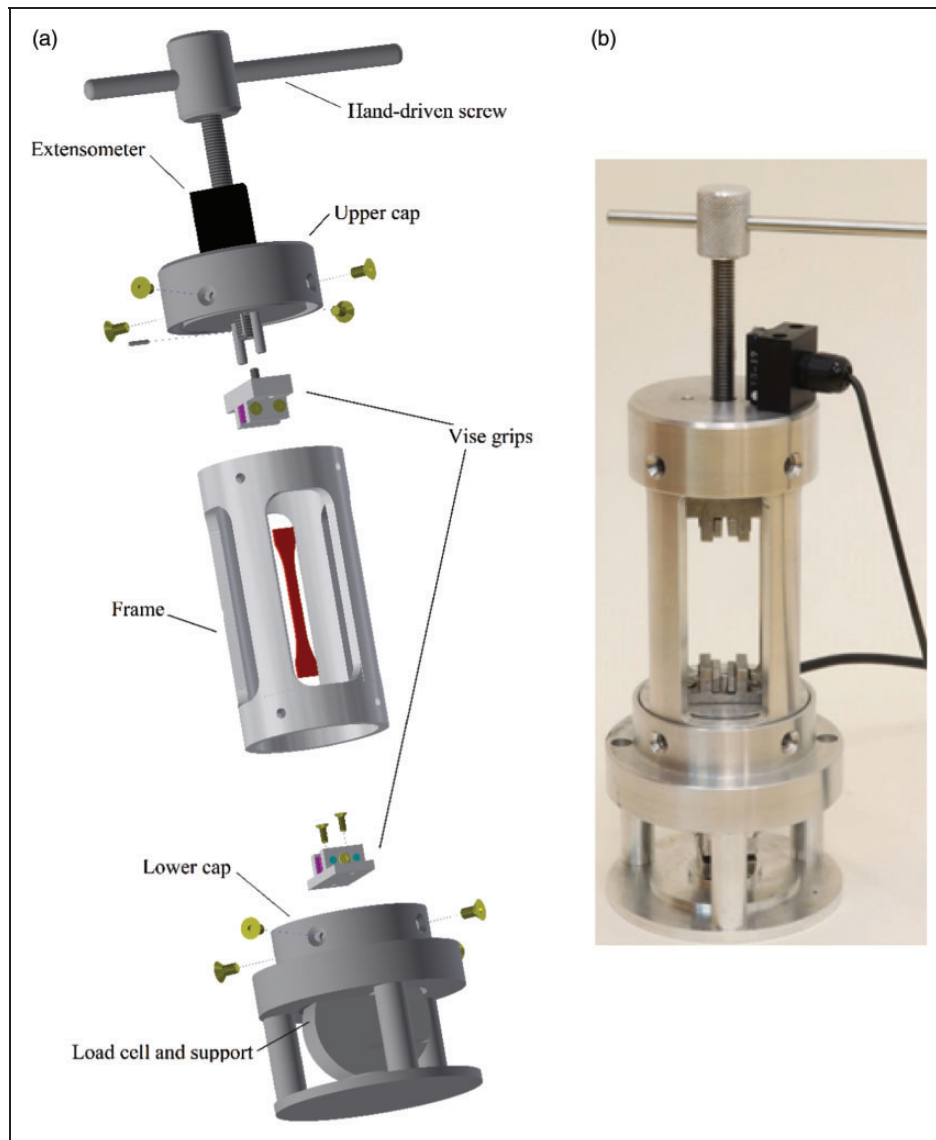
(a) Exploded view of the designed testing machine; (b) the assembled device.
